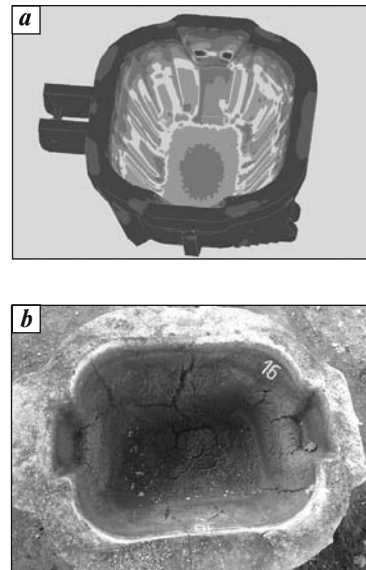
Forecasted (a) and full-scale (b) location of cracks on the inner surface of the mold
